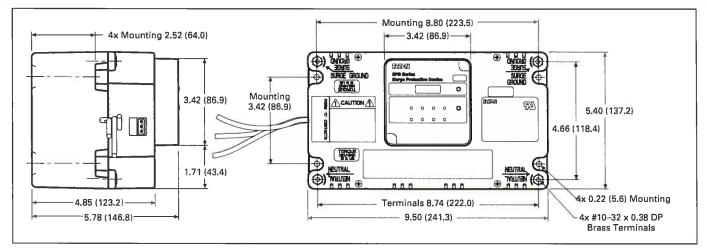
Dimensions of 250 through 400 kA Integrated Units
